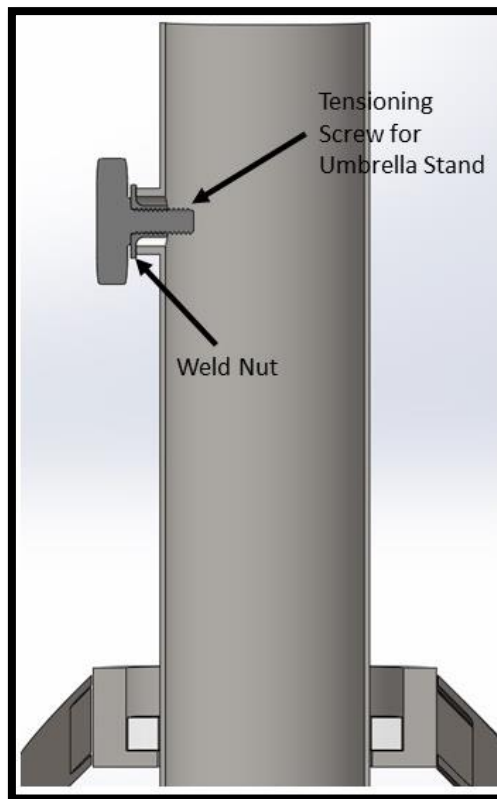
Cut View of Tensioning Screw for Umbrella Stand Connection
